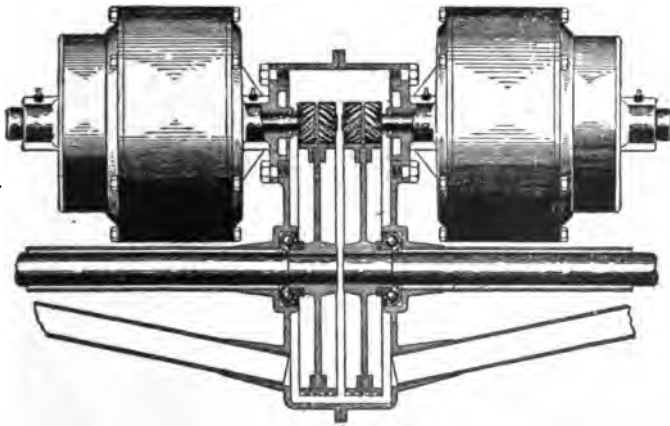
Plan Diagram of Two Motors Working on "Herring-bone" Gears to Two Sides of Divided Rear Axle Without Differential.
